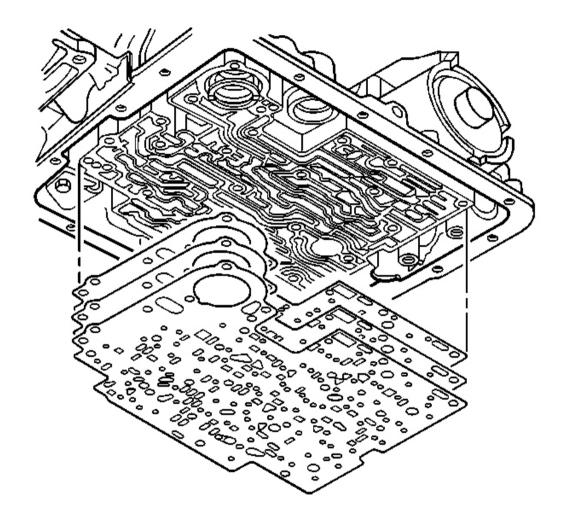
Spacer Plate To Valve Body Gasket & Spacer Plate And The Spacer Plate To Transmission Case Gasket Courtesy of GENERAL MOTORS CORP.
